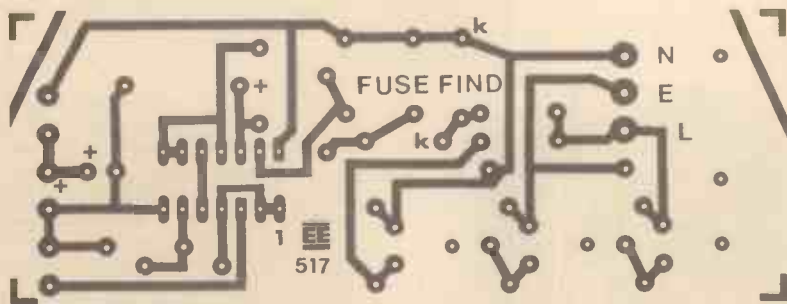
Full size printed circuit master. This board is available from the *EE PCB Service*: code EE517.
